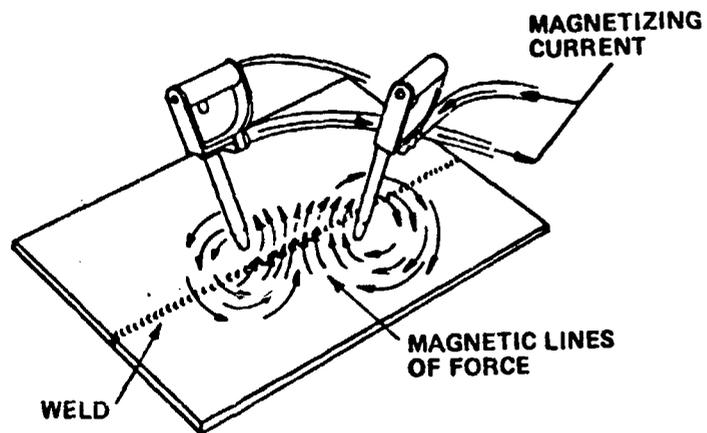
RECOMMENDED POSITIONING OF ELECTRICAL PRODS WHEN INSPECTING BUTT WELDS
